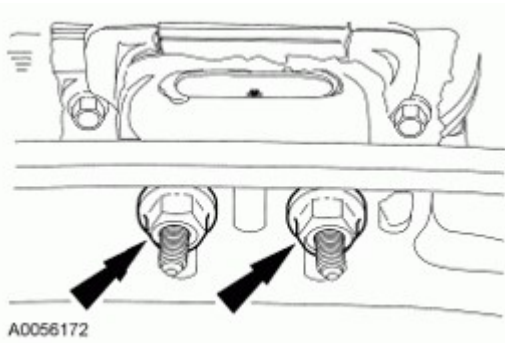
Locating Rear Transmission Insulator And Retainer Nuts
